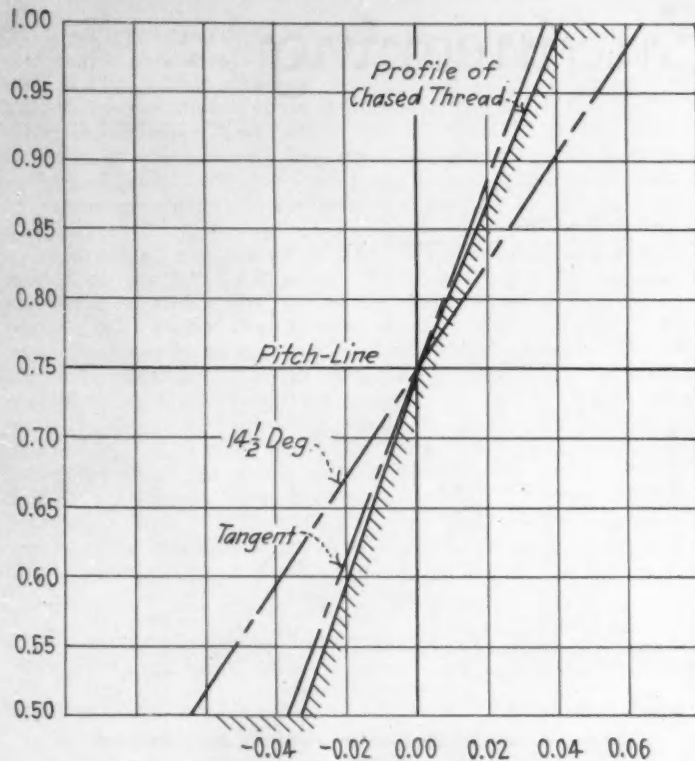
AXIAL SECTION OF THE CHASED THREAD
